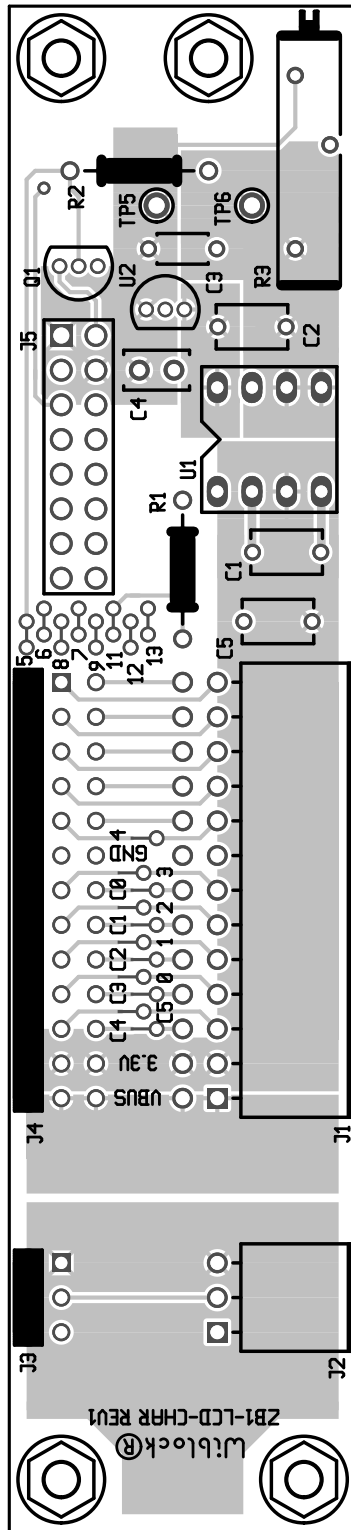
ZB1-LCD-CHAR Top Assembly Drawing
